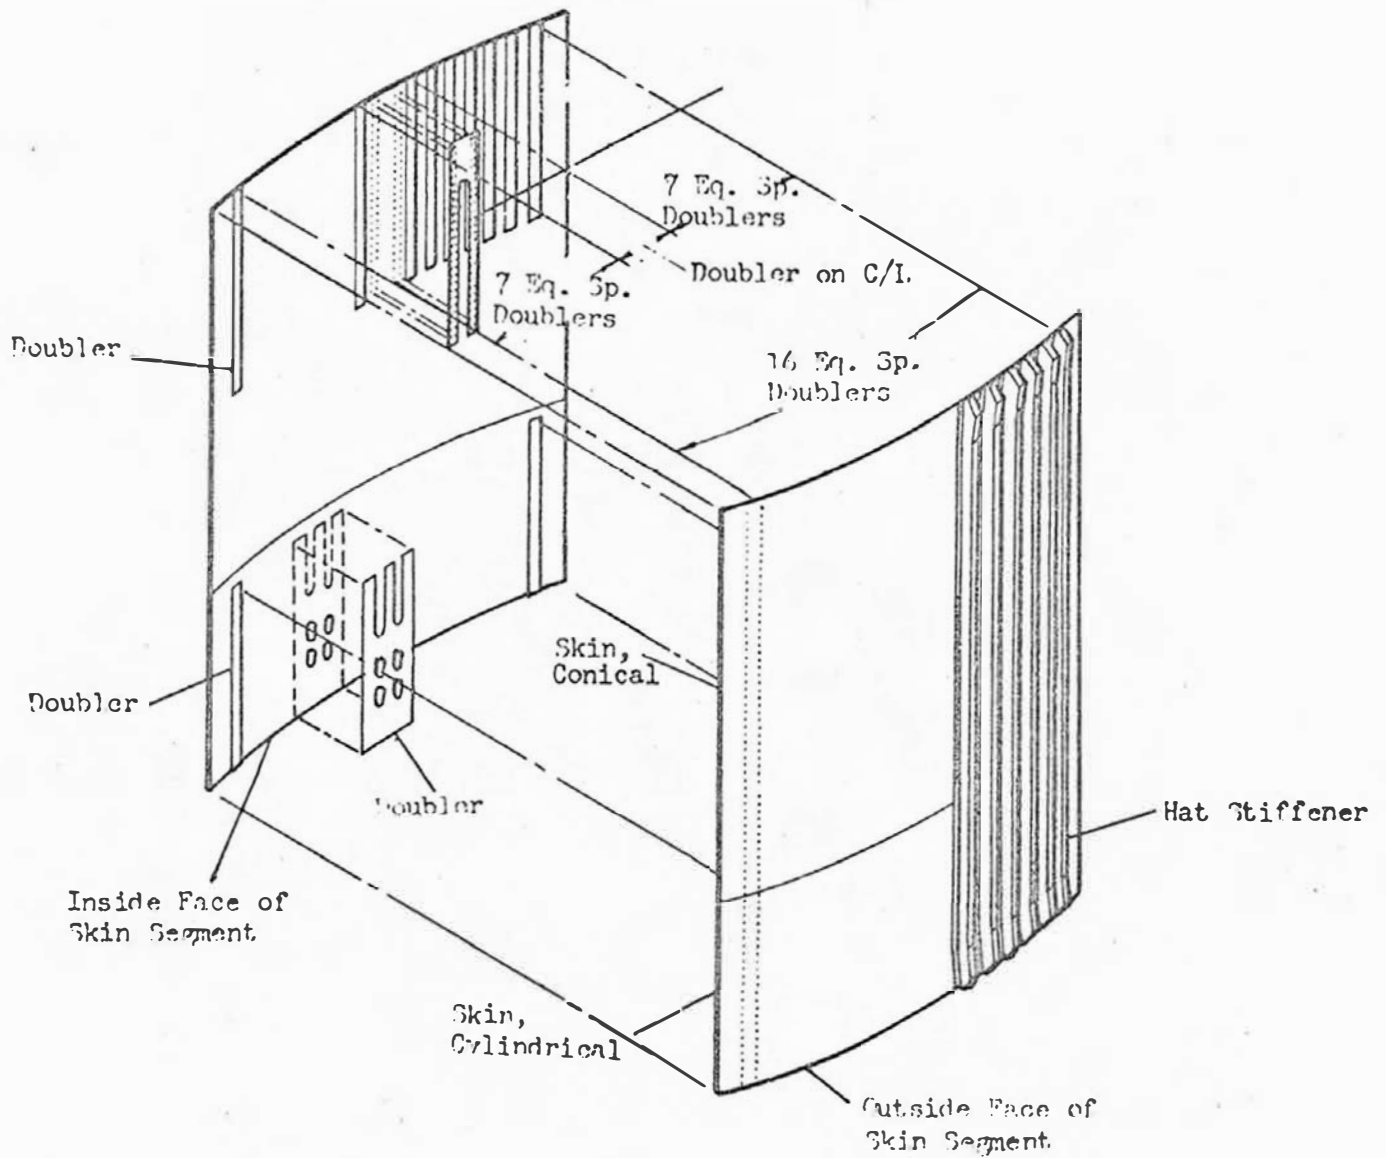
Skin Segment Assembly 60B14400-3-900
